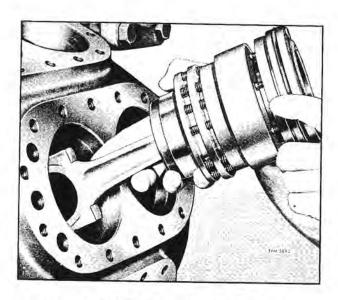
Installing Connecting Rod, Piston Liner, and Unloader Assembly
